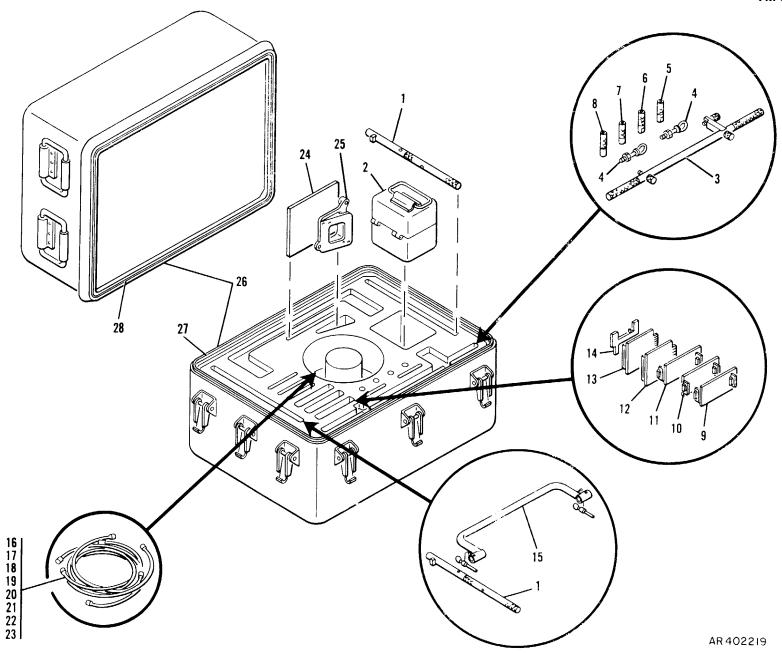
Direct support unique special tool and test equipment (11738864).
